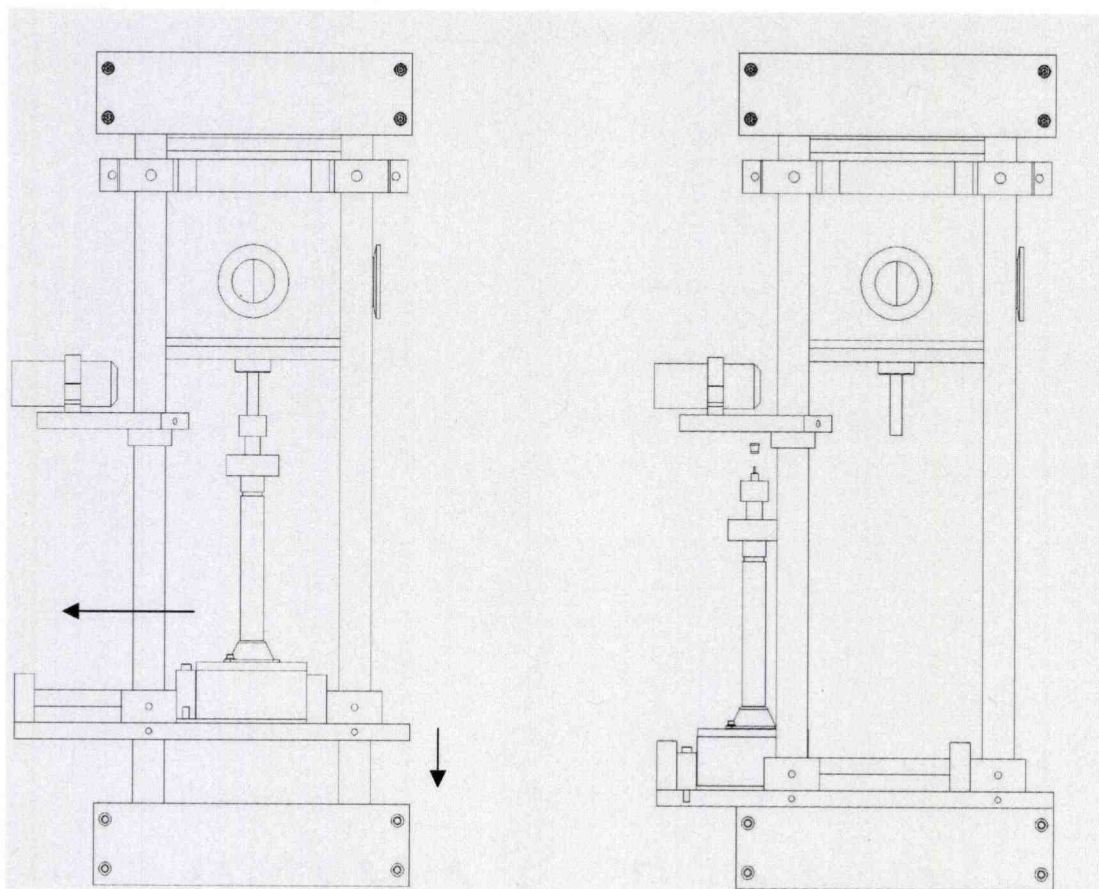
Schematic side view of machine showing movement for loading of BMG.
